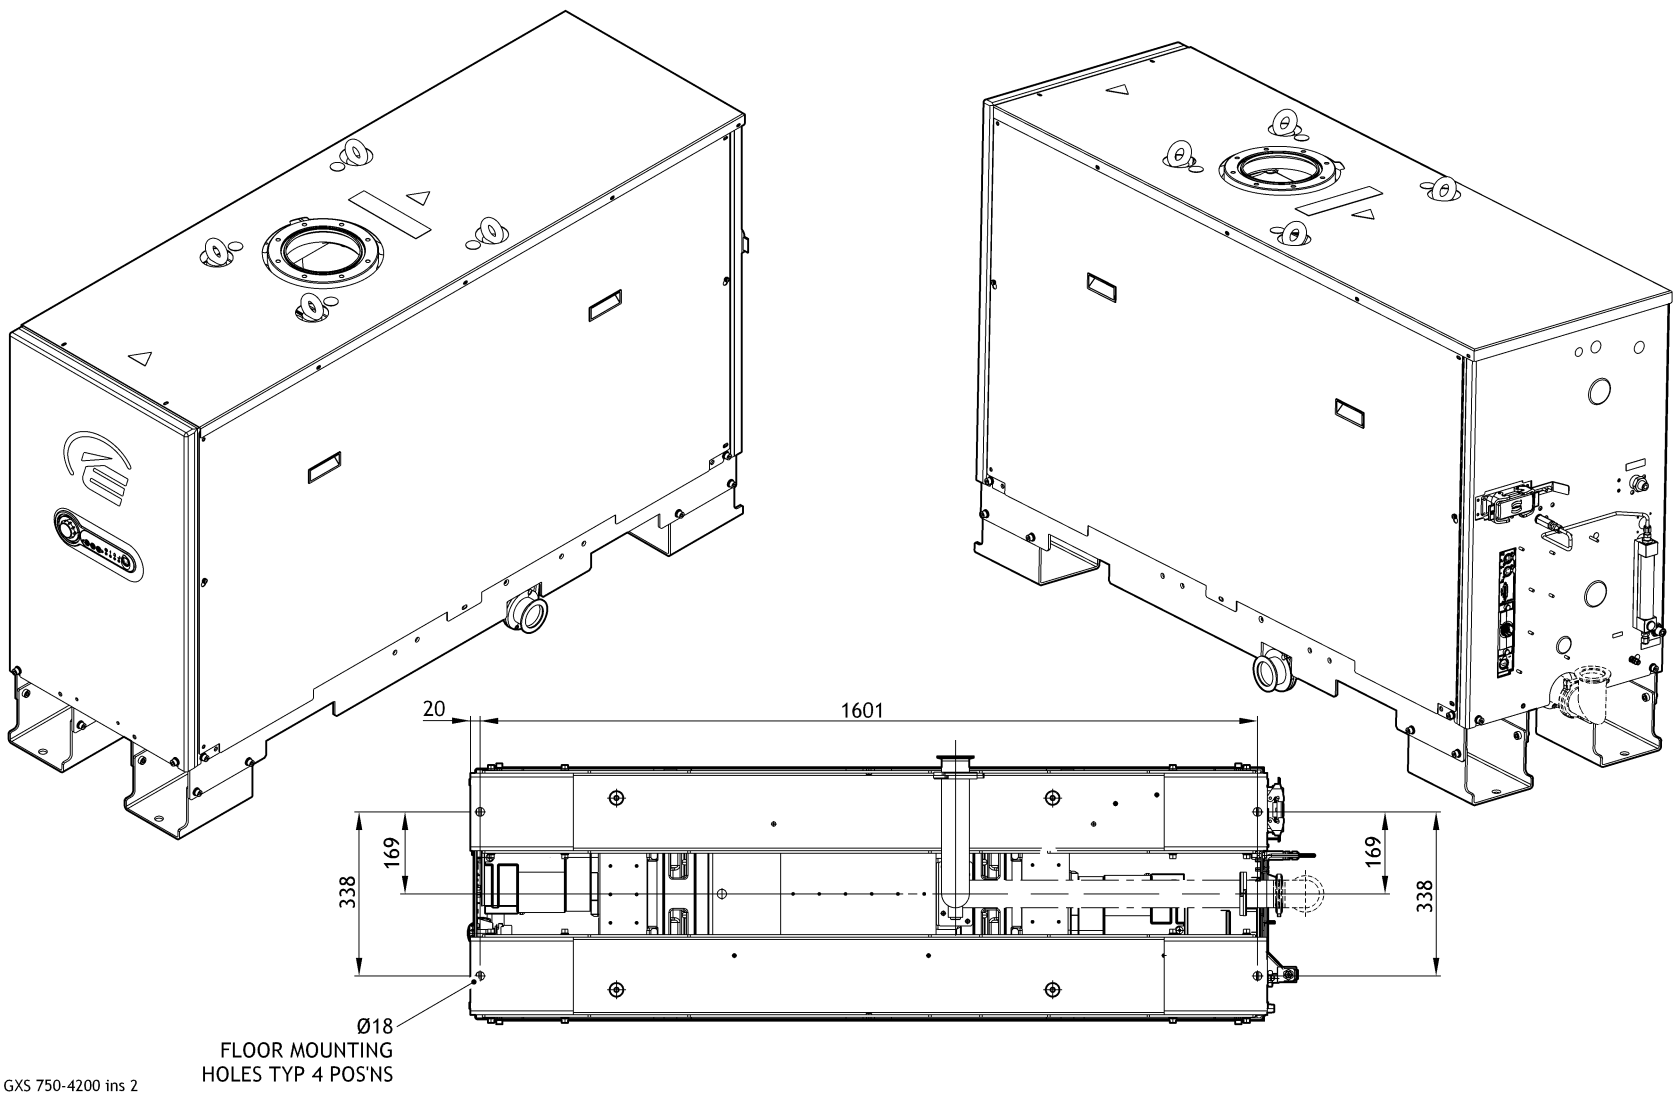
GXS750/4200 installation drawing (Sheet 2)
